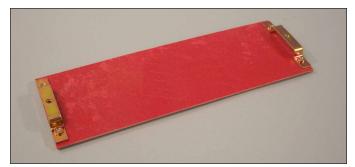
Mounting Brackets Installed on the Bottom Aux. CT Module Insulation Barrier.
